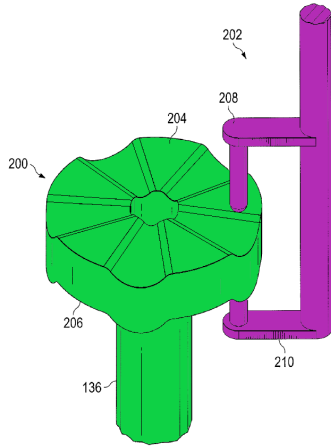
Schematic representation of the wobble drive mechanism that uses a movable follower. Components: 136 = drive shaft, 200 = wobble disk, 202 = follower assembly, 204 = distal cam face, 206 = proximal cam face, 208 = distal follower, 210 = proximal follower. Adapted from: [69]
